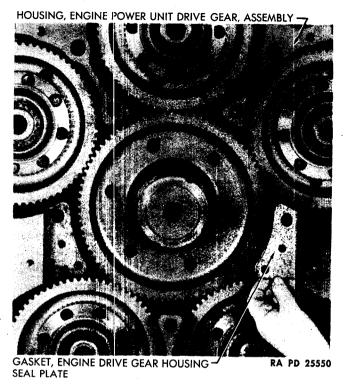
Installing Engine Drive Gear Housing Seal Plate Gasket
